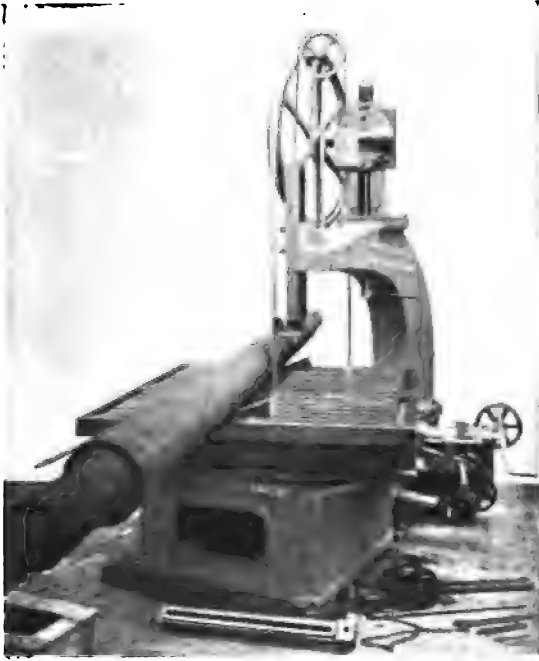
BAND SAWING MACHINE FOR METAL.
